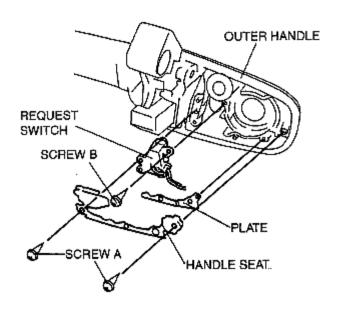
Identifying Keyless Beeper Remove/Install Components Courtesy of MAZDA MOTORS CORP.
